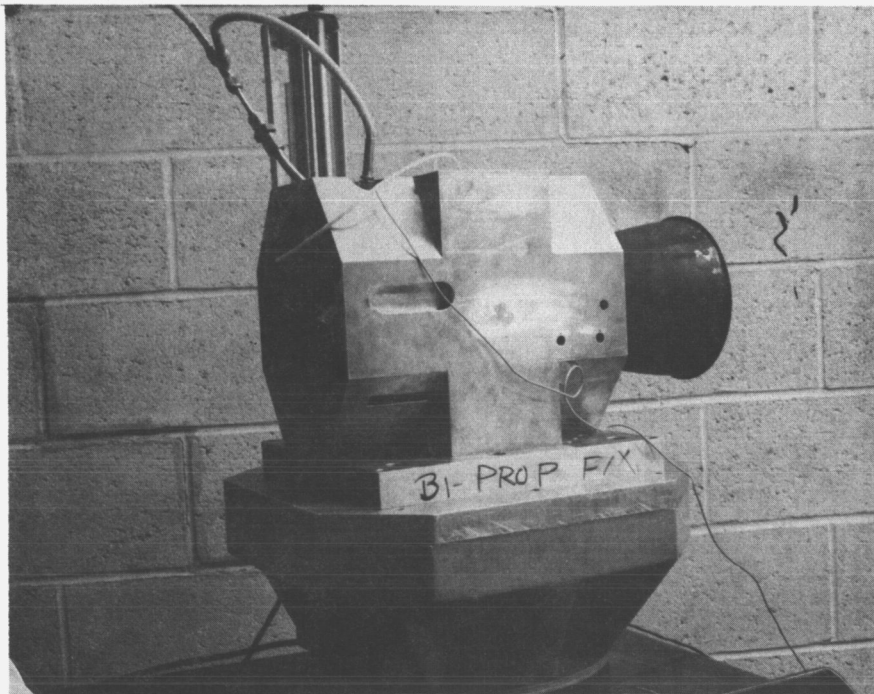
Valve S/N 266 (Engine 761-1) Shock Testing Setup
